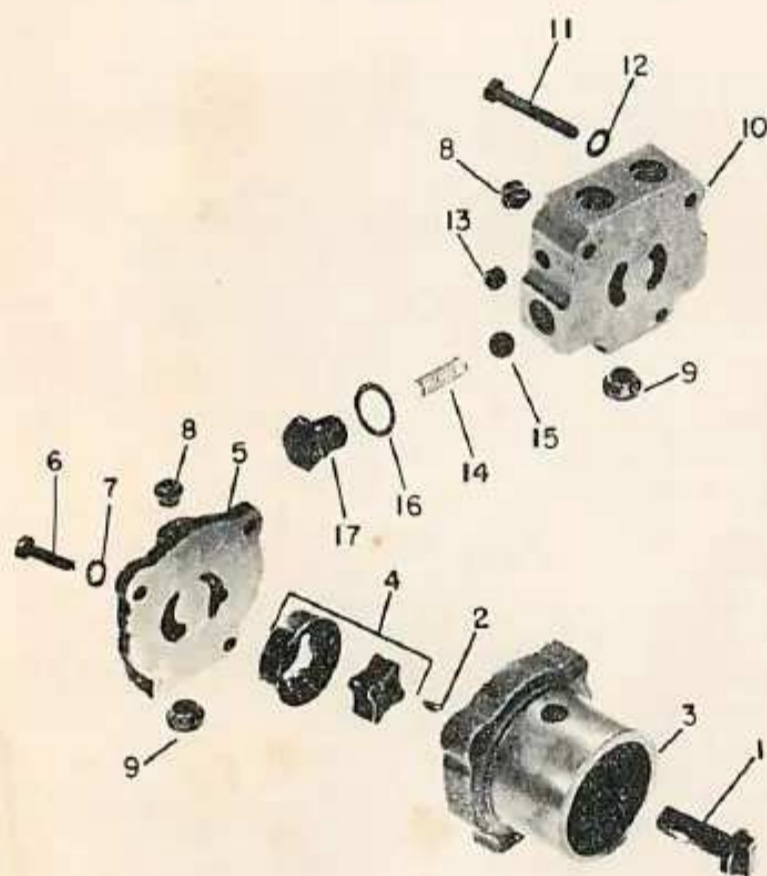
Exploded view of transmission lubrication pump. Cover (5) is used on all models except those equipped with Reverse-O-Torc Drive. On Reverse-O-Torc equipped models, valves (15) in pump cover (10) allow pump to pressurize the transmission lubrication circuit when rotating in either direction.
